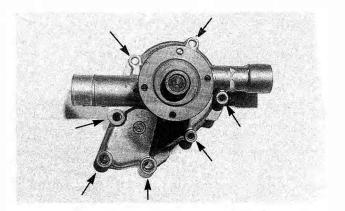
Coolant pump mounting points (arrows) on 4-cylinder engine.
